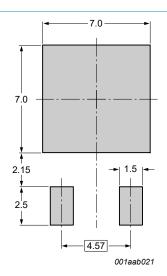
SOT428: minimum pad sizes for surface-mounting
